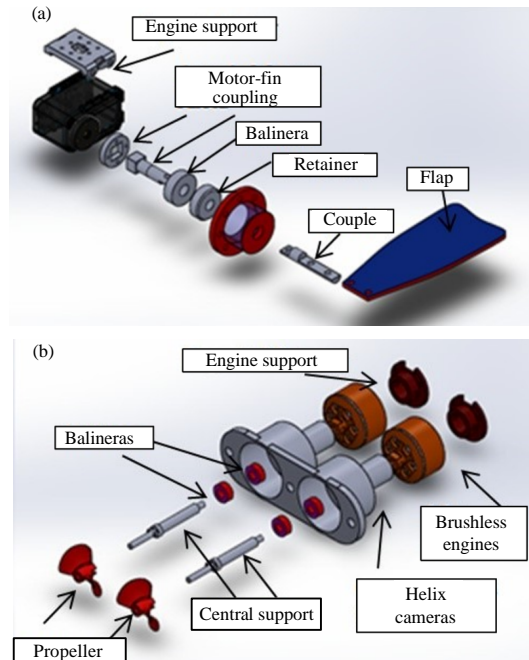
Turbine support assembly: a) Short/long flap support assembly and b) Turbine support assembly
